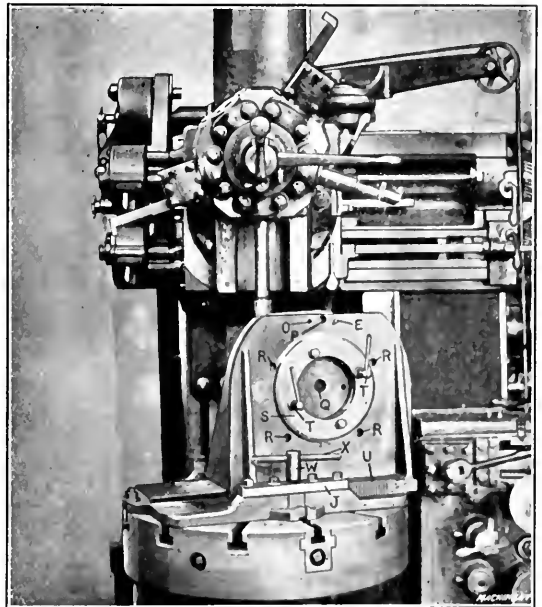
Rear View of Fixture for Roller Bearing Bracket
